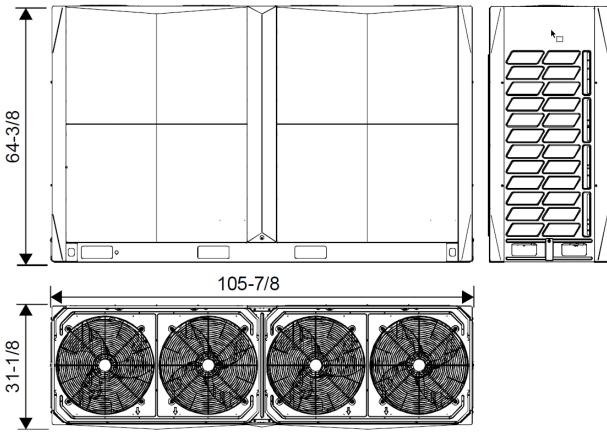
38VMAR Dimensions (20 - 28 Tons)
